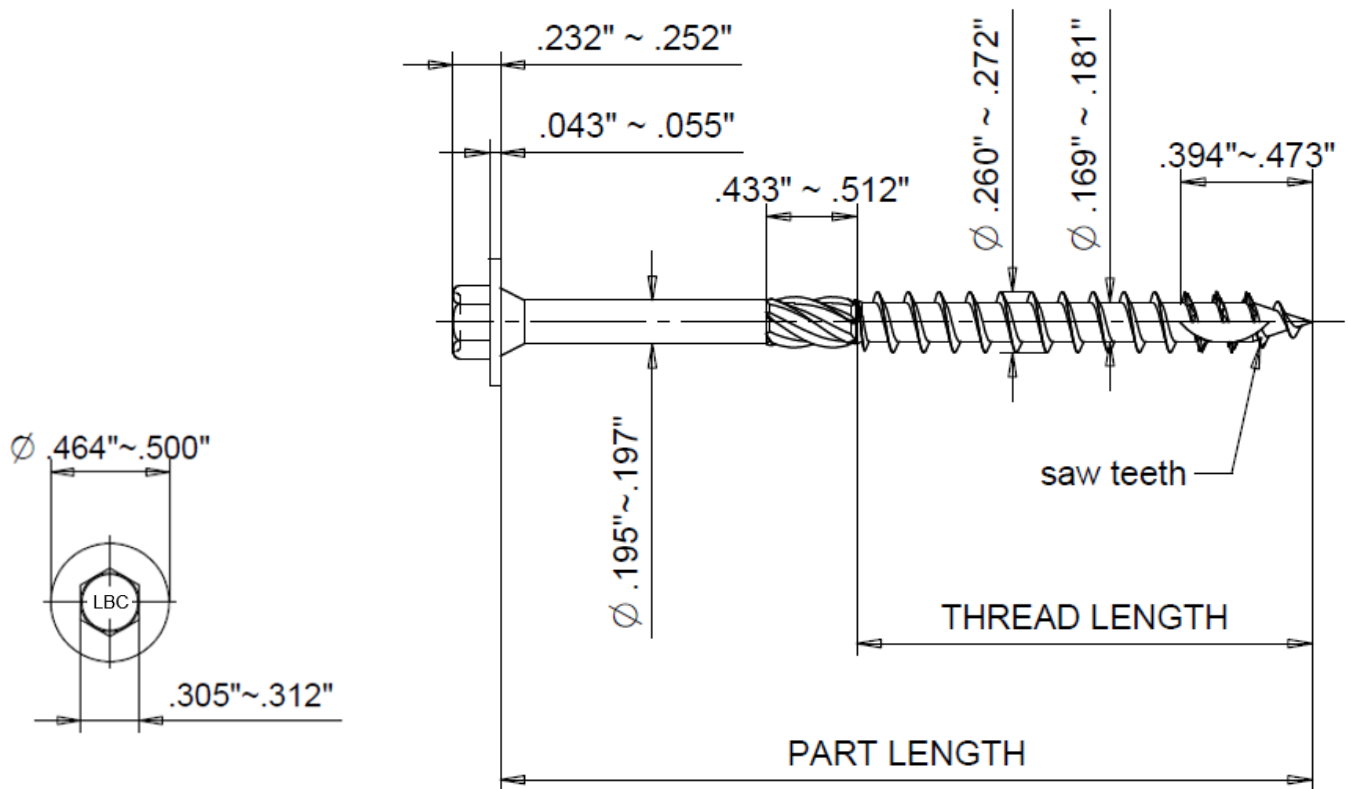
FRAMEGRIP HEX WASHER HEAD WOOD SCREWS
